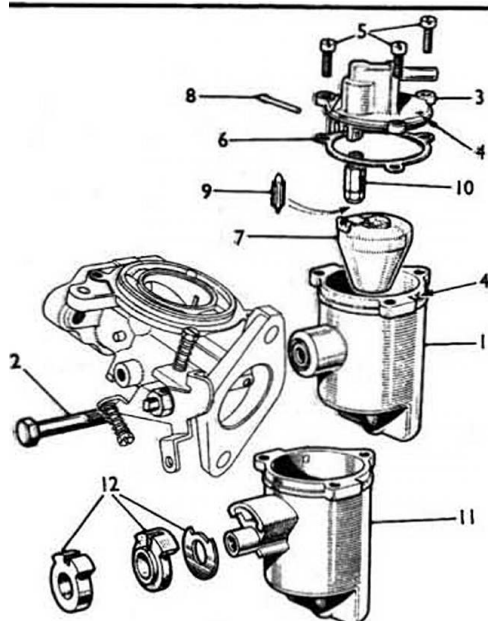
DISMANTLING THE HS6 CARBURETTOR - STAGE 5
